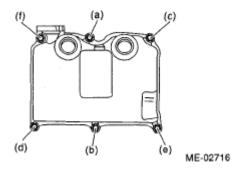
Identifying Rocker Cover Bolts - LH Side Courtesy of SUBARU OF AMERICA, INC.
